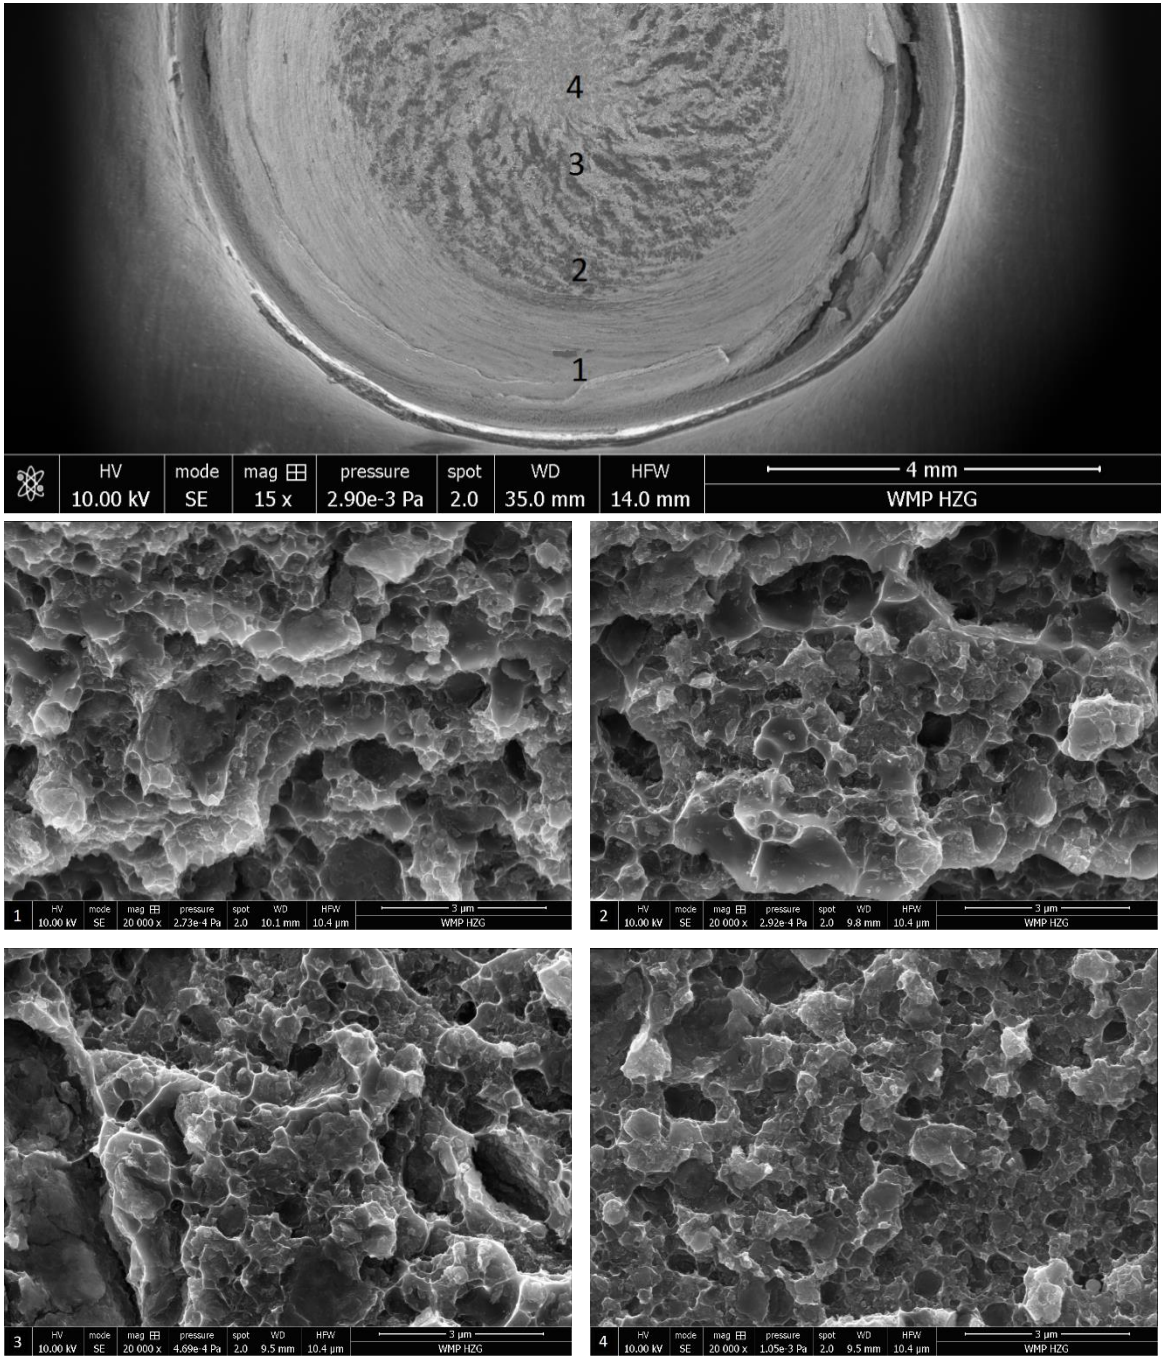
Fractographic Images of the Through the Weld fracture mode in CTT (macrograph and details)
